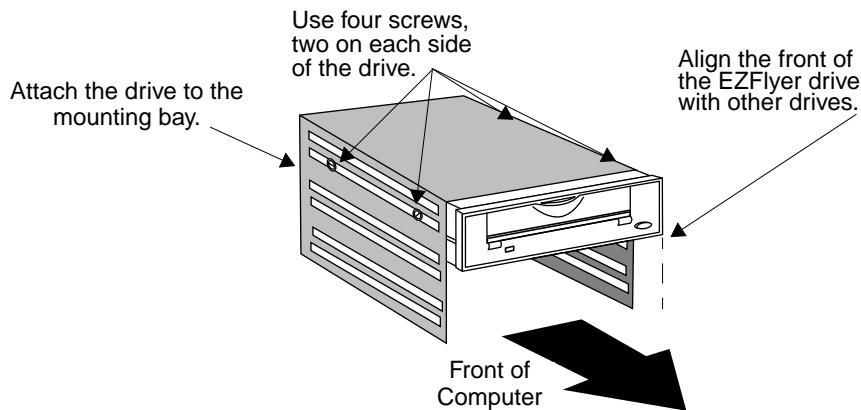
Mounting the Drive in a 5.25-inch Mounting Bay
